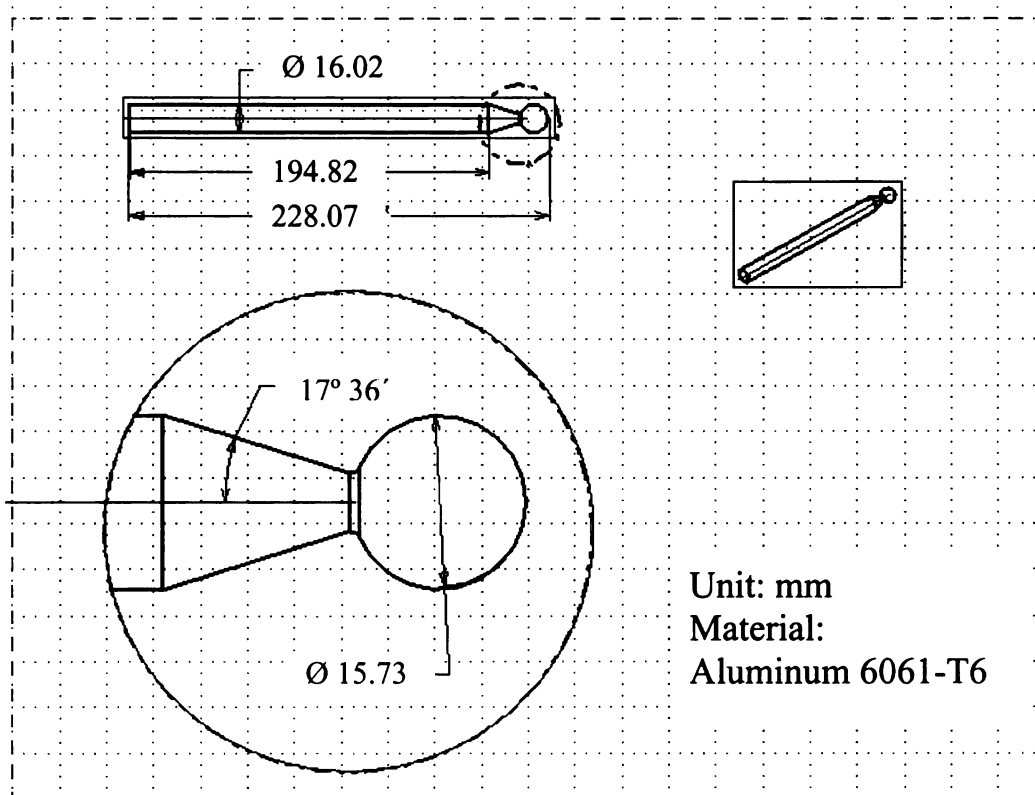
(b) Detailed drawings of a rod with a cone-ball end.
